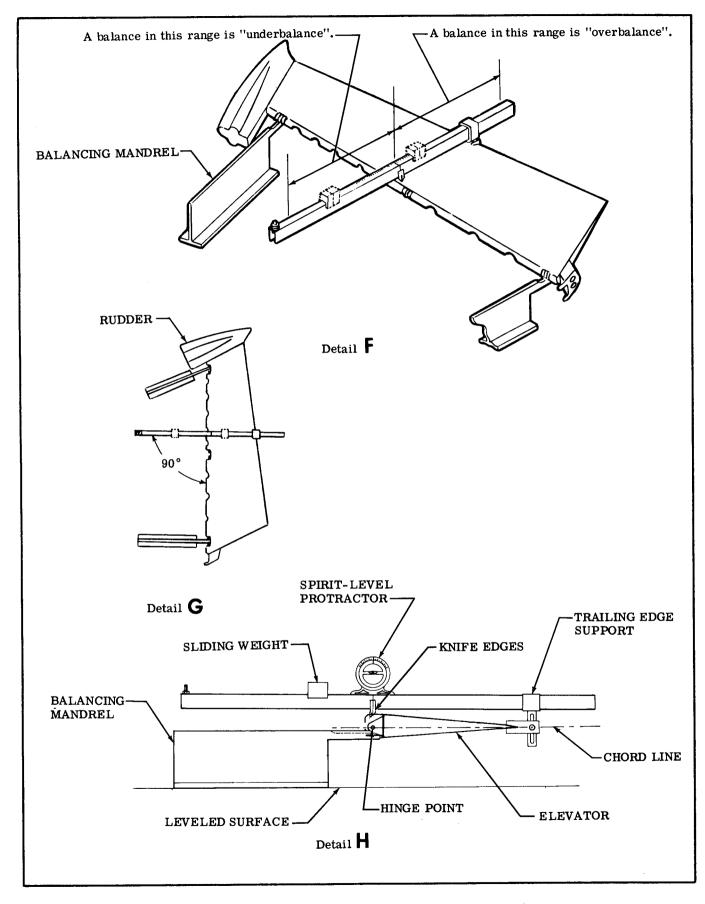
Control Surface Balancing (Sheet 4 of 5)
